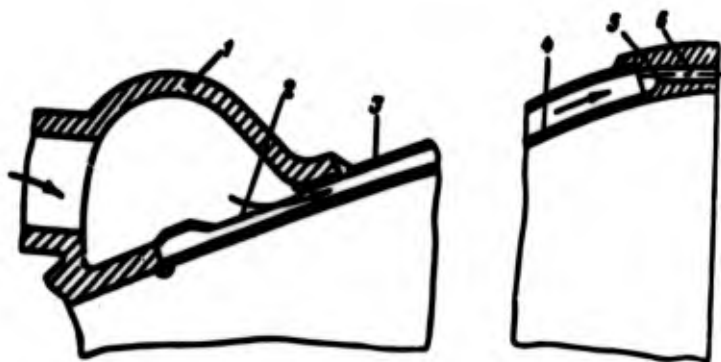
Exit section of nozzle which is cooled by gases tapped from the turbine of the turbopump assembly: 1 - collector of gas; 2 - window; 3 - outer wall of nozzle; 4 - inner wall of nozzle; 5 - nozzle ring; 6 - opening for exit of gas from system for cooling of nozzle.
